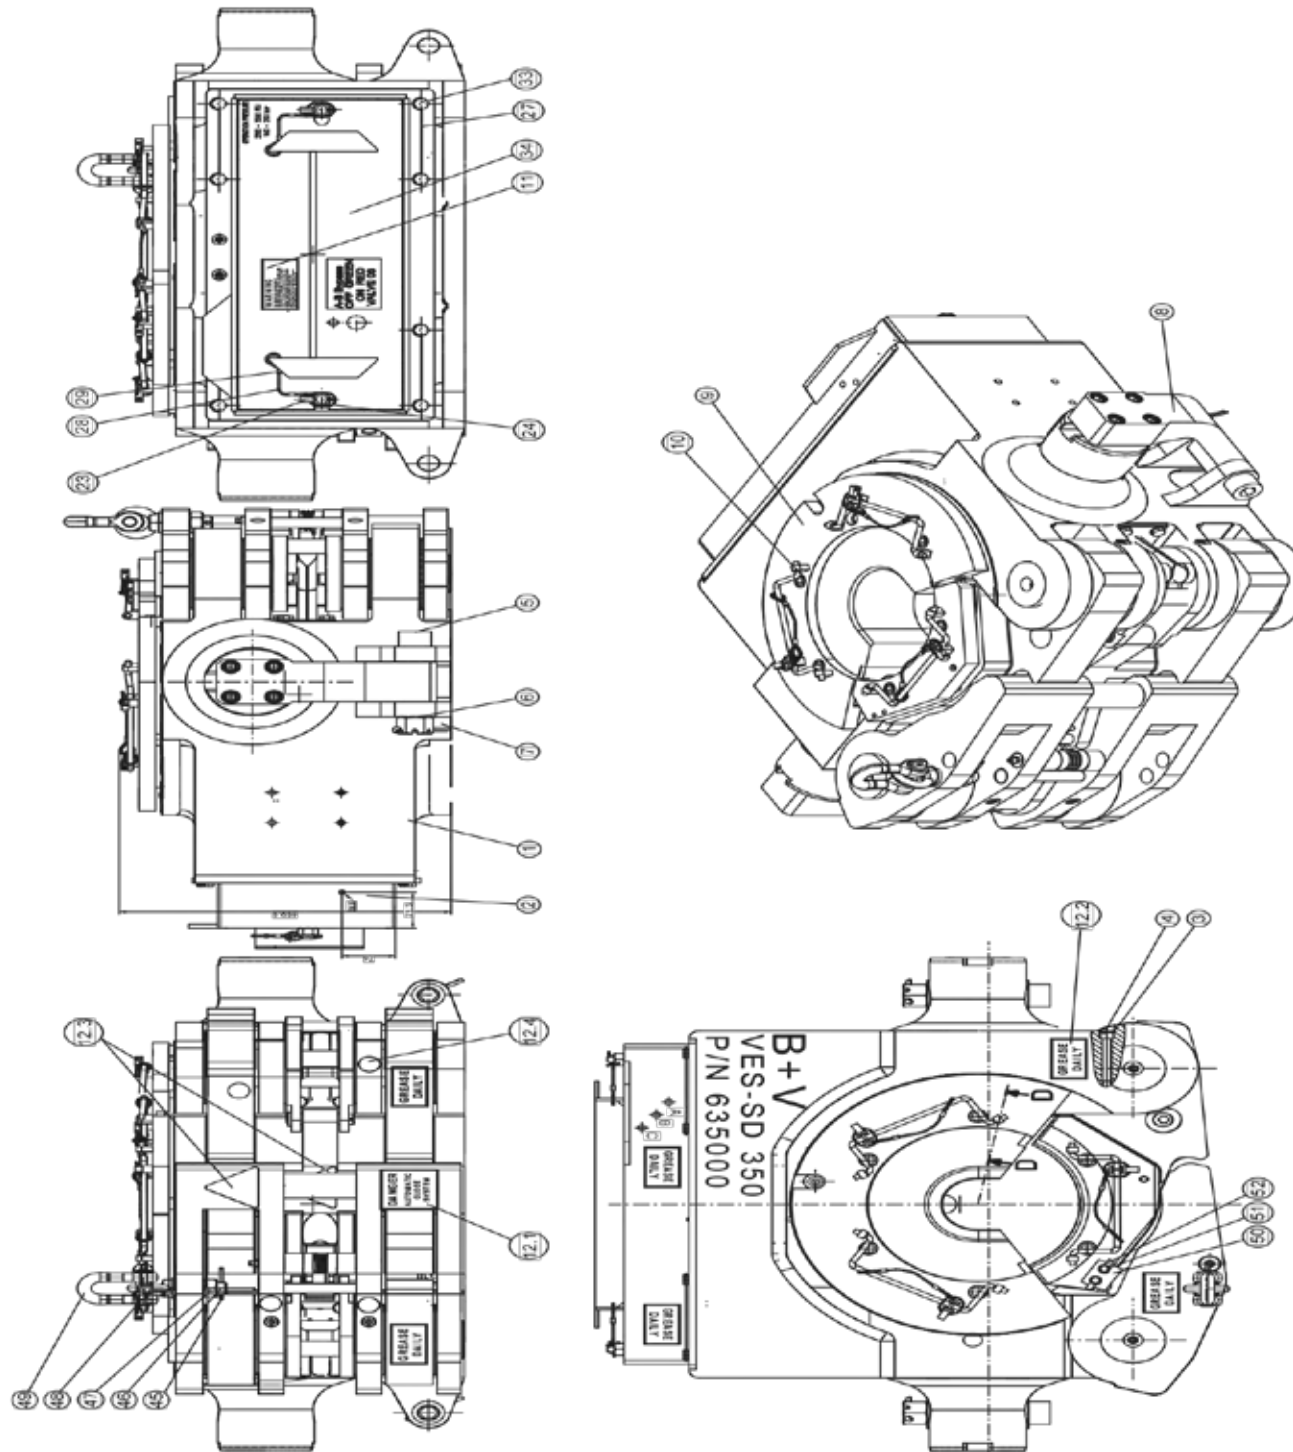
Drawing 635000-Y -FL VES-SD 350 Page 1
